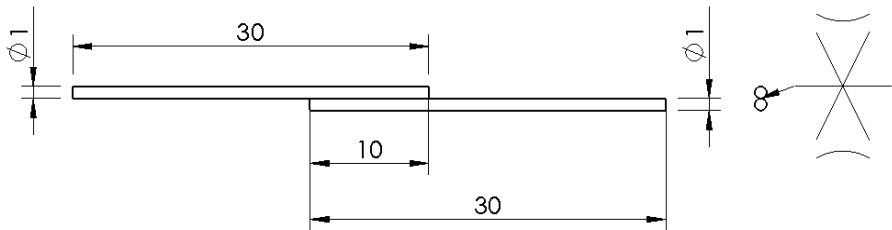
Joint schema for NiTi N/AISI 316L wire joints
